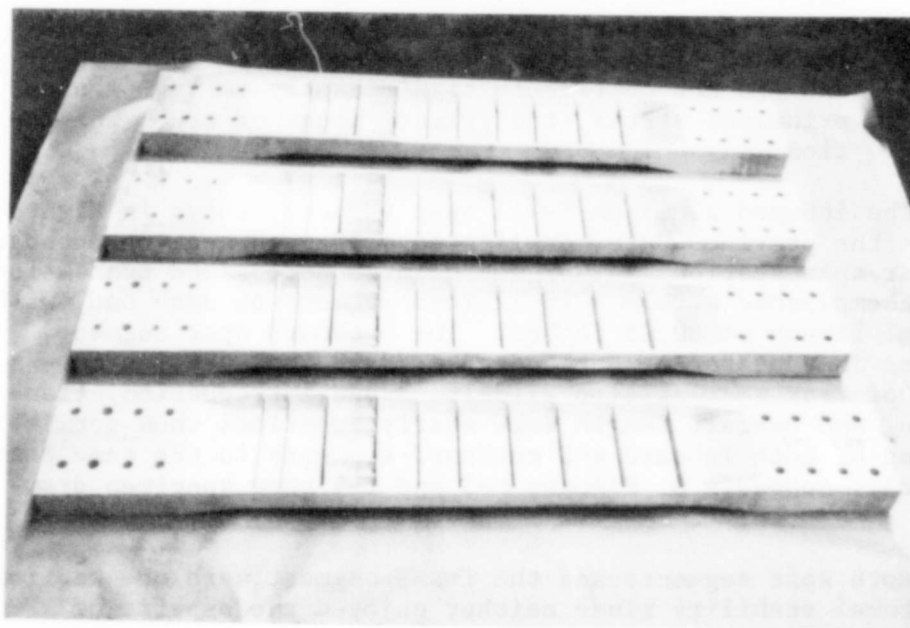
F-111 REAR SPAR INBOARD TEST SPECIMENS
